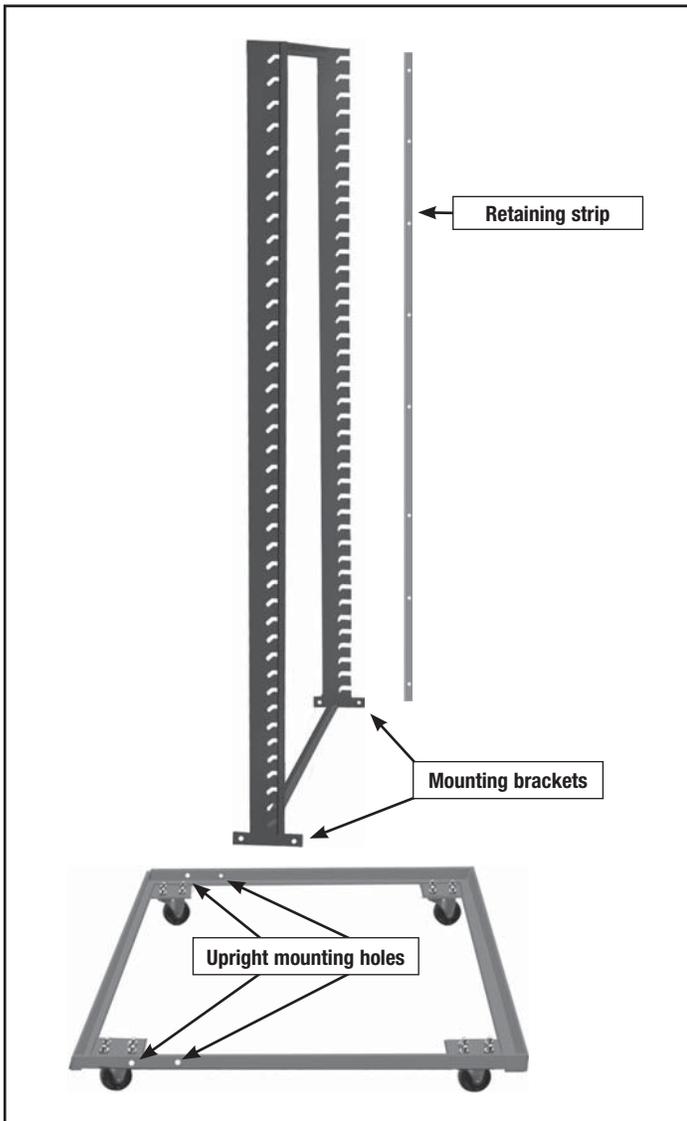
Attach upright to base; side of upright with welded lock strip is in foreground (Models MR1824)
